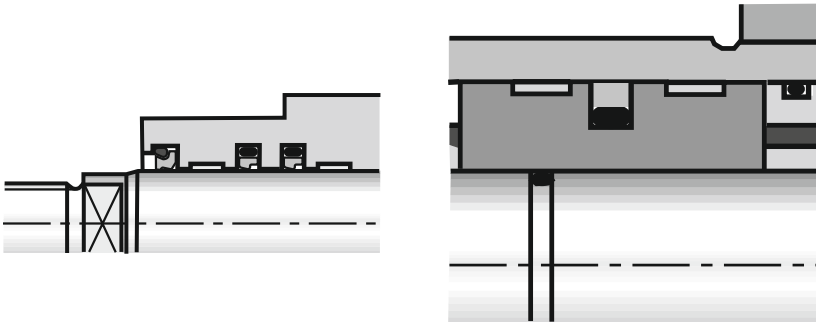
Rod and piston seal T-type by Bosch Rexroth
